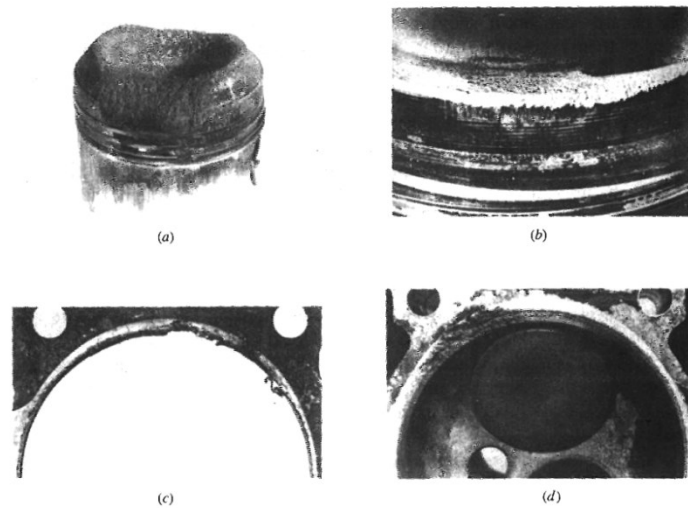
Component damages from abnormal combustion [23]: (a) piston holing by pre-ignition; (b) piston crown erosion after 10 hours of high-speed knocking; (c) cylinder head gasket splitting failure due to heavy knock; (d) erosion of aluminum cylinder head along the top of cylinder liner due to heavy knock.
